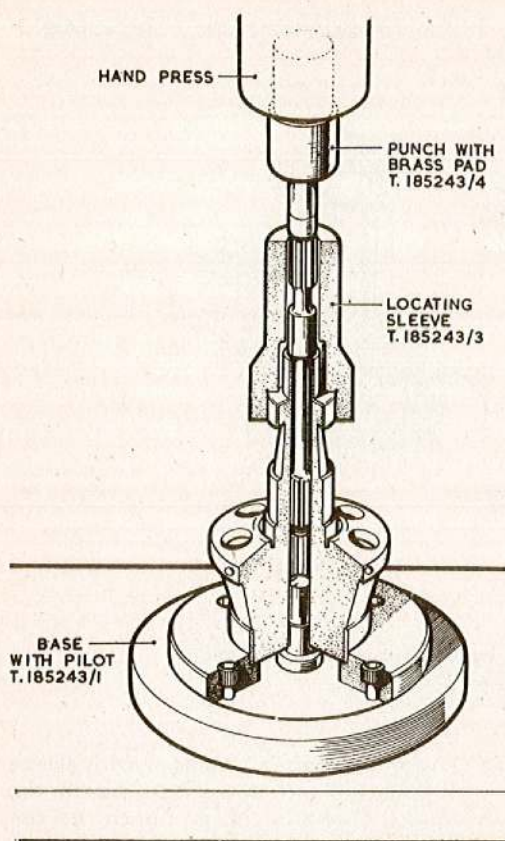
Inserting quill shaft in rotor, using tool T.185243
